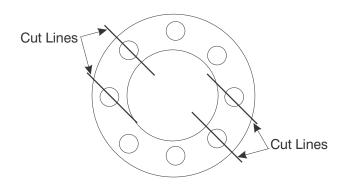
Cutting Pattern to Remove Shock Absorber from End Cap
